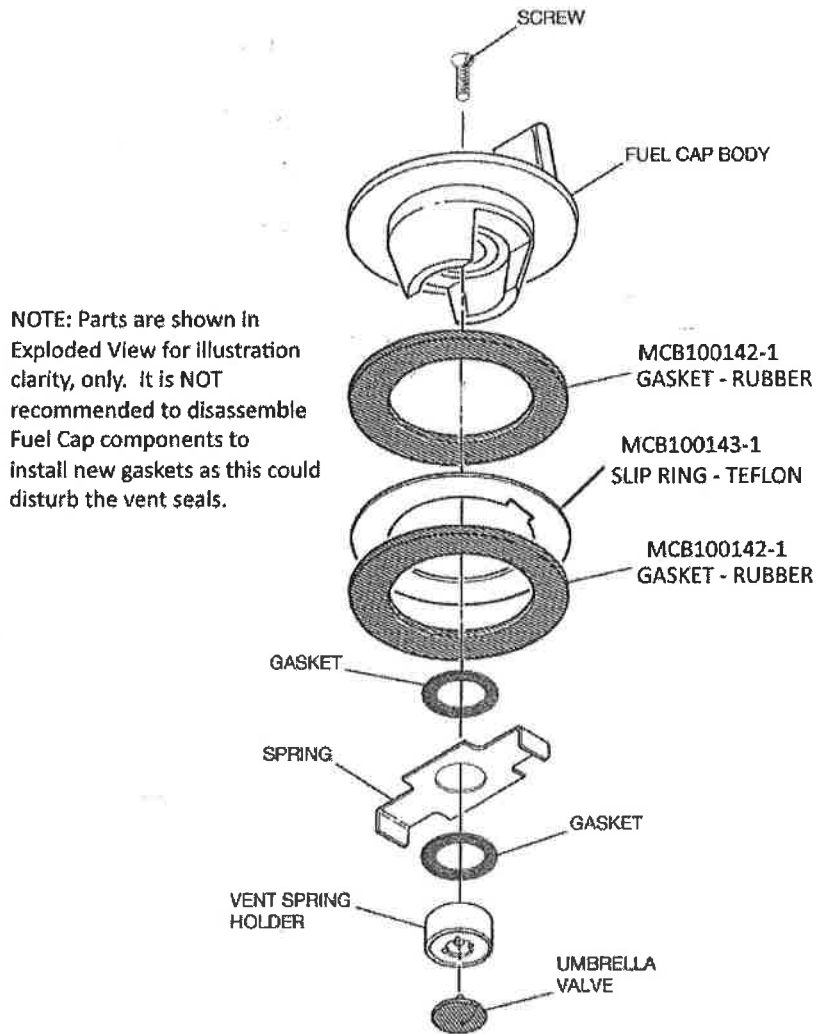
Exploded View of Cessna Fuel Cap Assembly P/N C156003-0101 w/McFarlane Gaskets and Slip Ring
